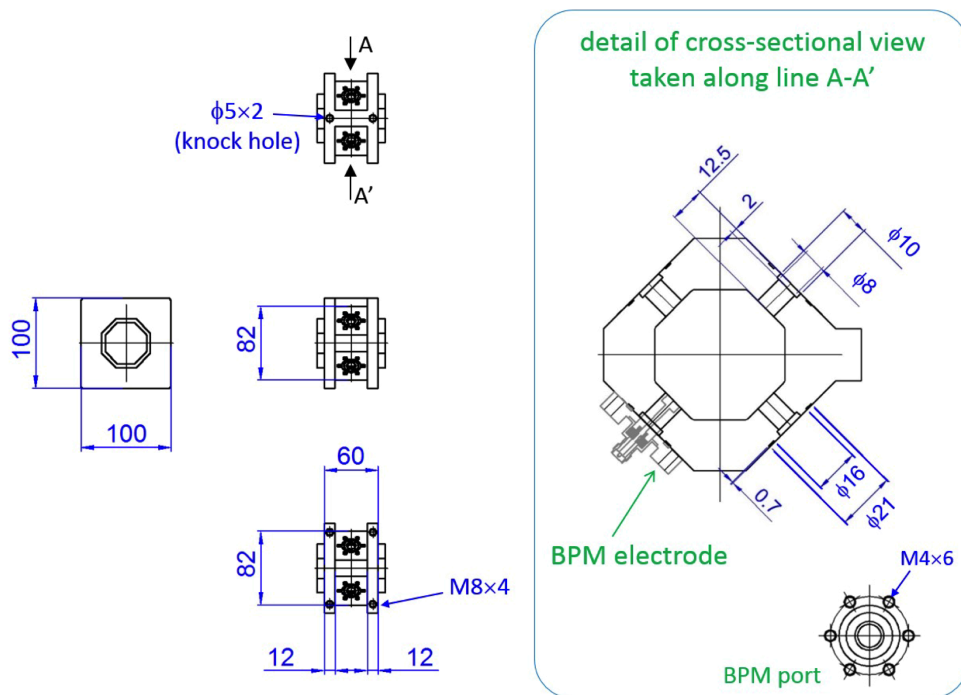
The BPM block for the straight sections. Four flange-mounted button electrodes are assembled on it.
